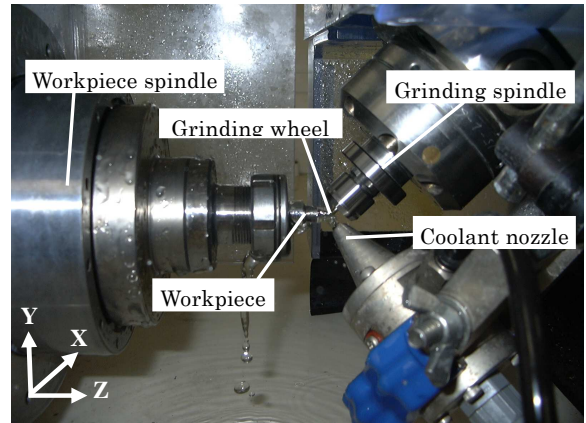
A view of the simultaneous 4-axes controlled grinding machine
